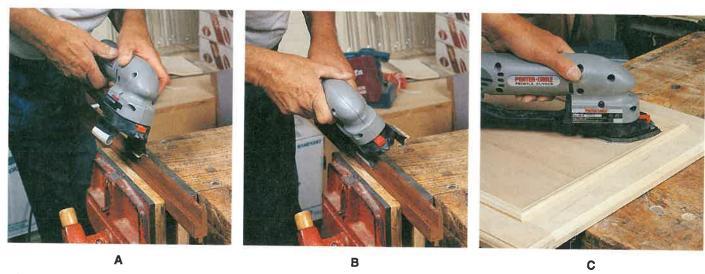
Profile sander. A—The convex edge of this drawer finger pull is smoothed. B—A quick change of pad, and the sander is smoothing the concave groove. C—The pad has been mounted for sanding into corners on this flat panel door. (*Chuck Davis Cabinets*)
